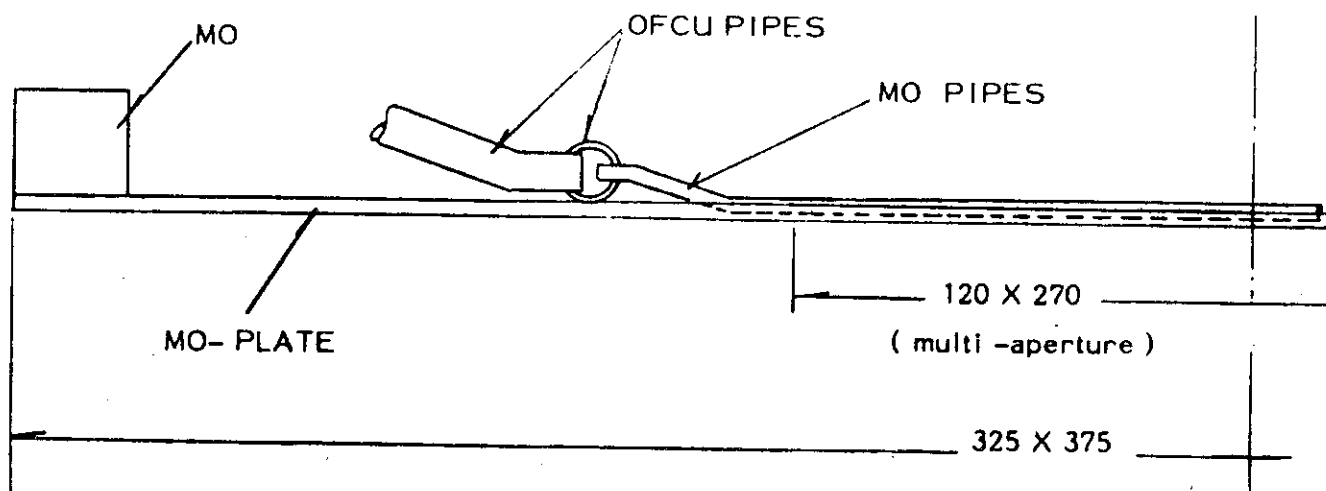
A cross sectional view of the molybdenum grid TYPE-II
